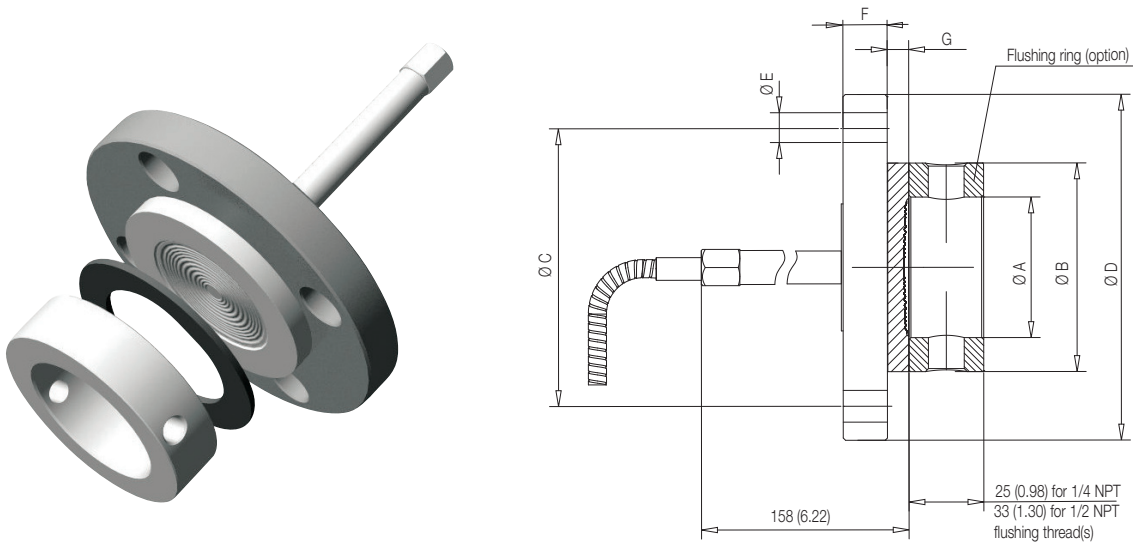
Flush rotating-flange seals (flushing ring as an option)
